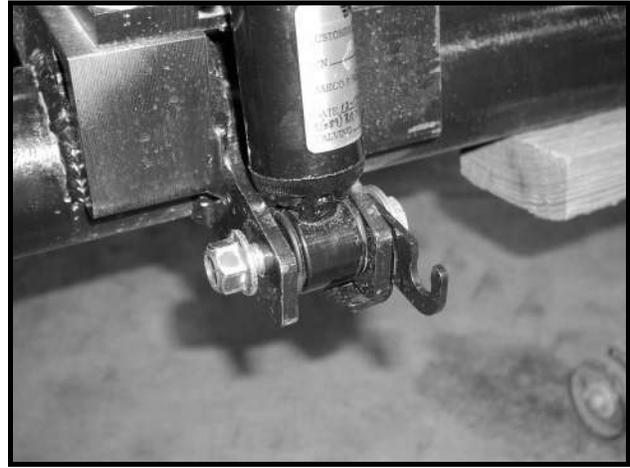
Remove Lower Driver-Side Shock Bolt
